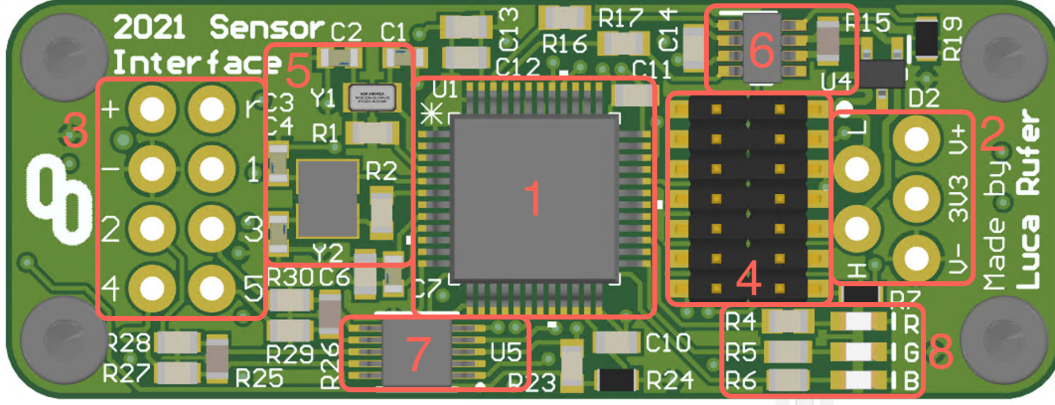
Top view of the Sensor Interface PCB with key components
